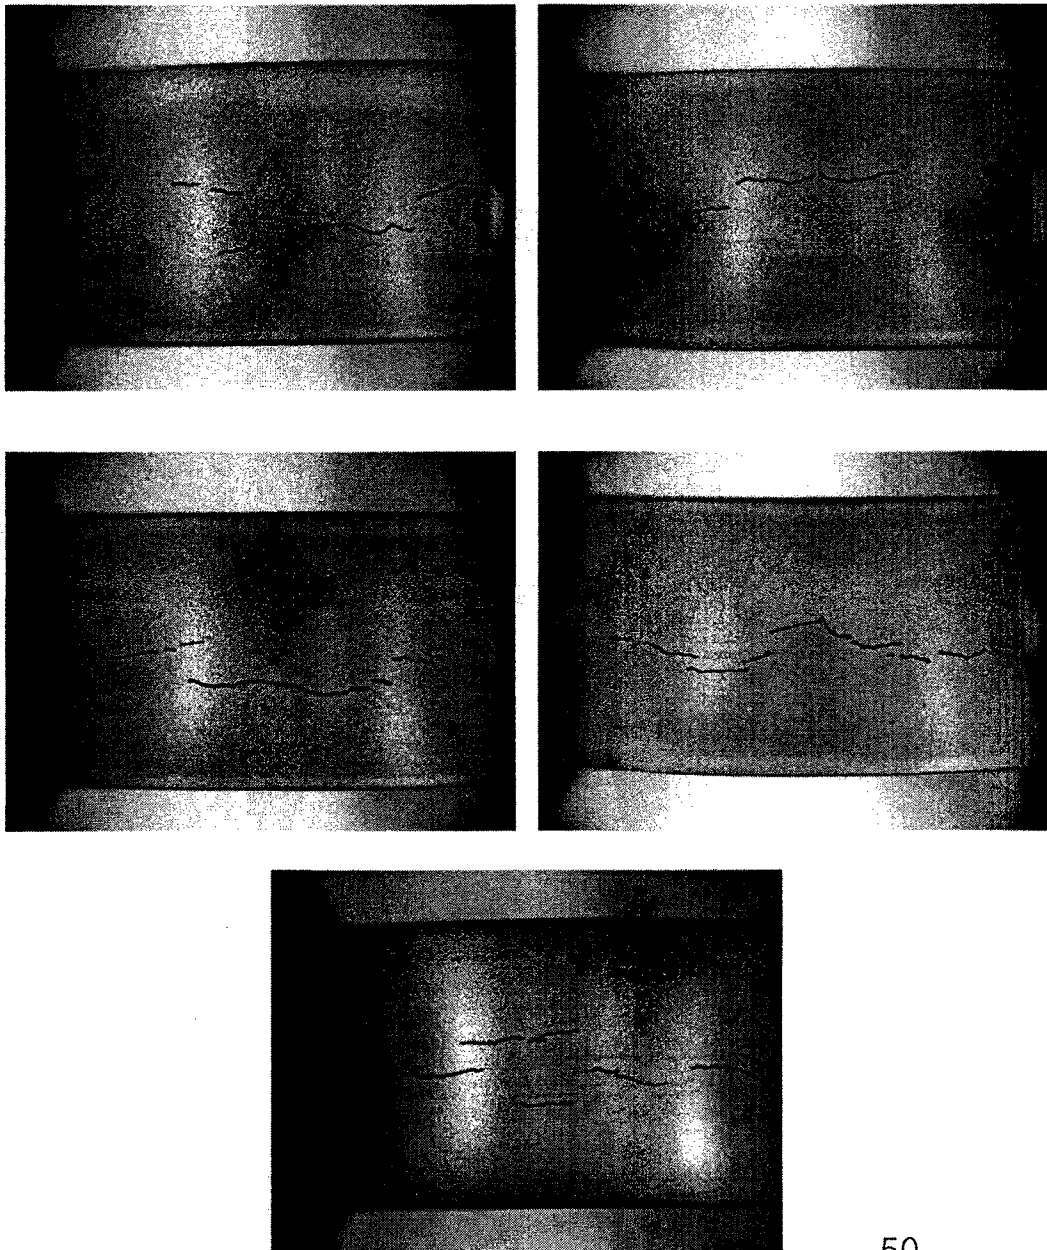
Summary of crack initiation test using modified RUB specimens
